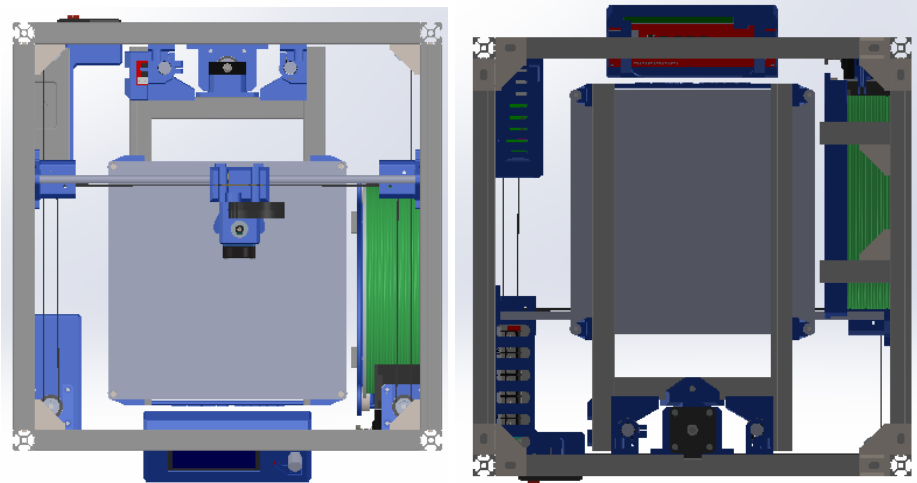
Top and Bottom Views of Proposed Assembly.
